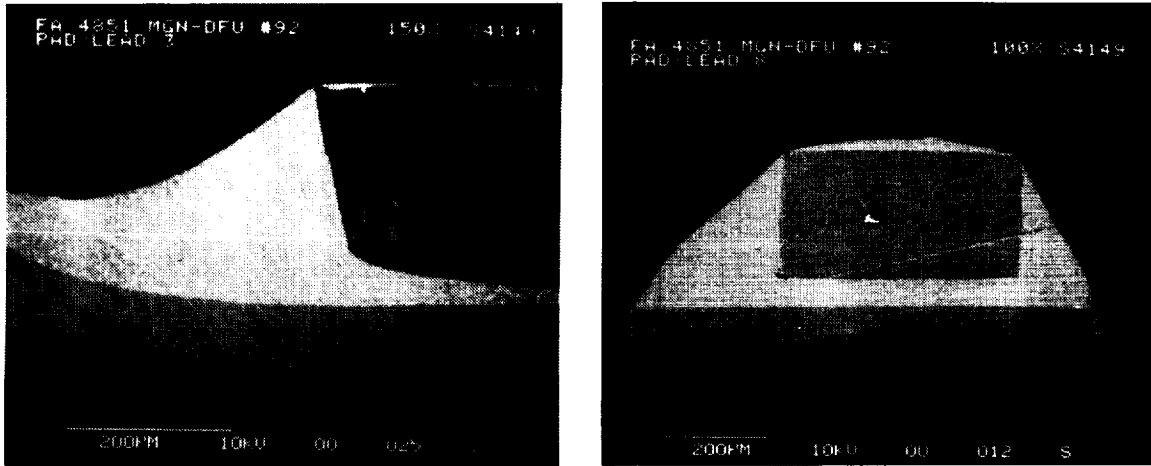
SEM cross-sections showing excellent solder joints on opposite side (pins 3 and 8) of DFU part that failed open-circuit
